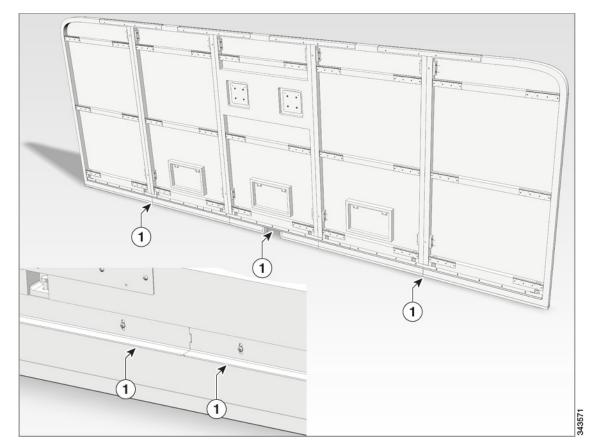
Installing the Lower L Brackets Into the Wall Panels (2 of 2)
